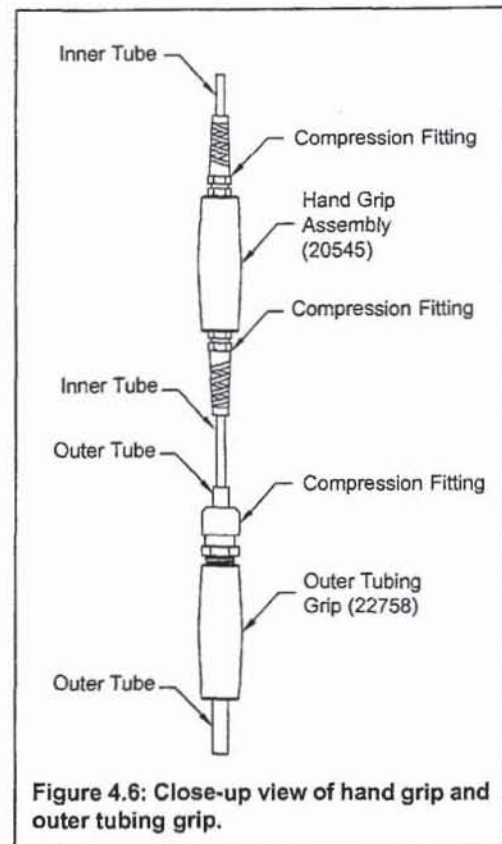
Close-up view of hand grip and outer tubing grip.
